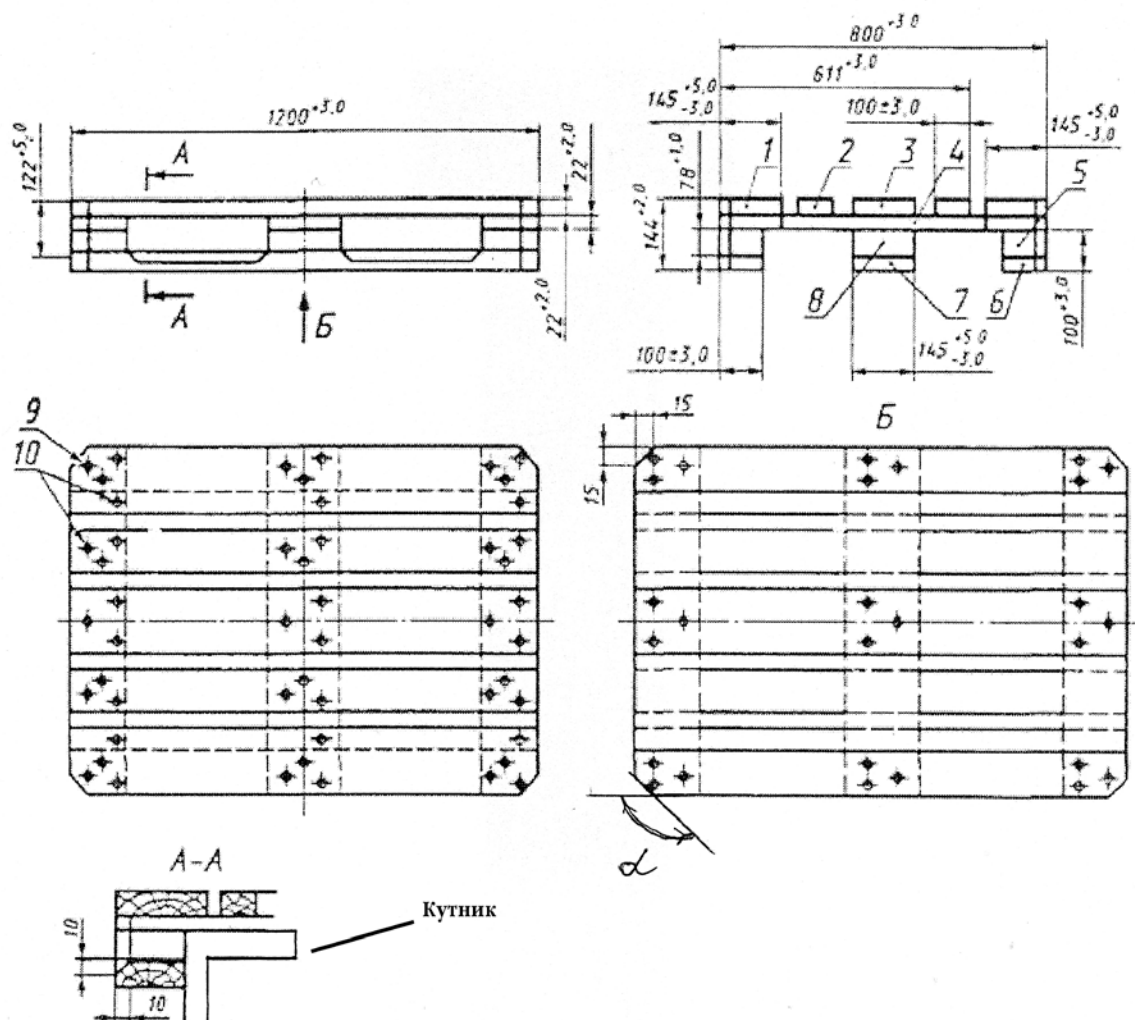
Flat wooden pallet 1 - extreme board flooring; 2 - parquet flooring intermediate; 3 - parquet flooring average; 4 - Transverse board; 5 - had a sword; 6 - extreme board bases; 7 - board based on the average; 8 - a large sword; 9 - Screw nails.
